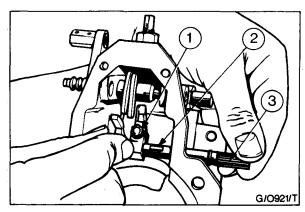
Removing the Governor Control Shaft (Dorset)
